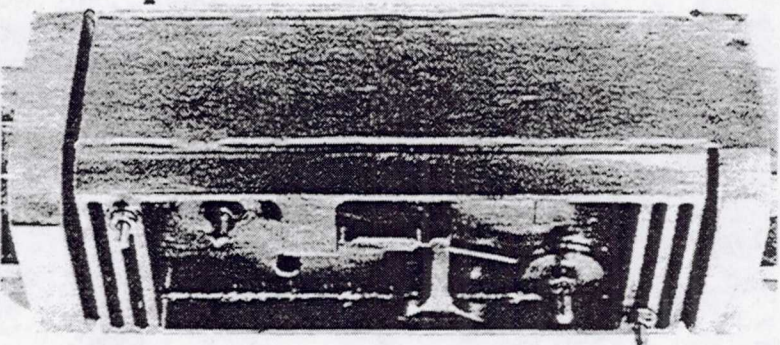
Balance W 64 after welding with mounting screws still attached
